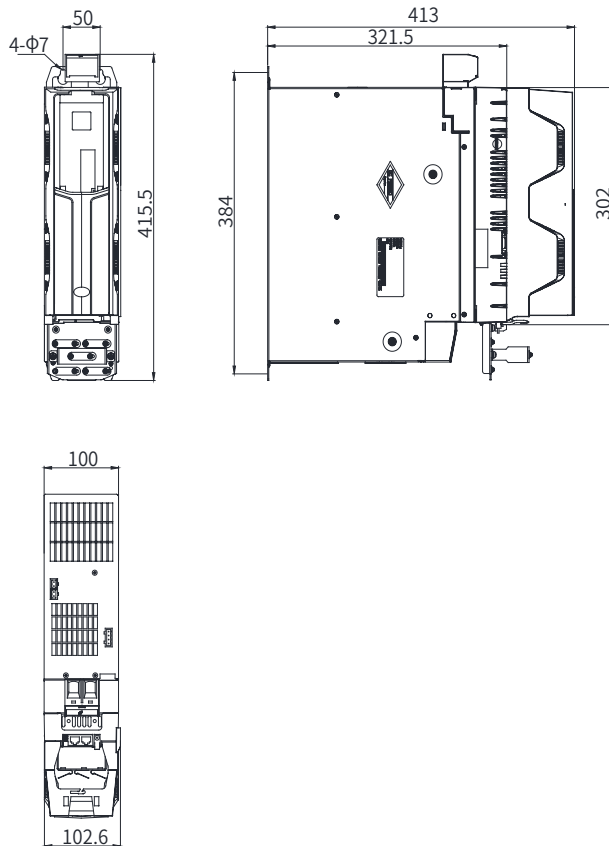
Outline dimensions of H3 DC choppers (mm)
